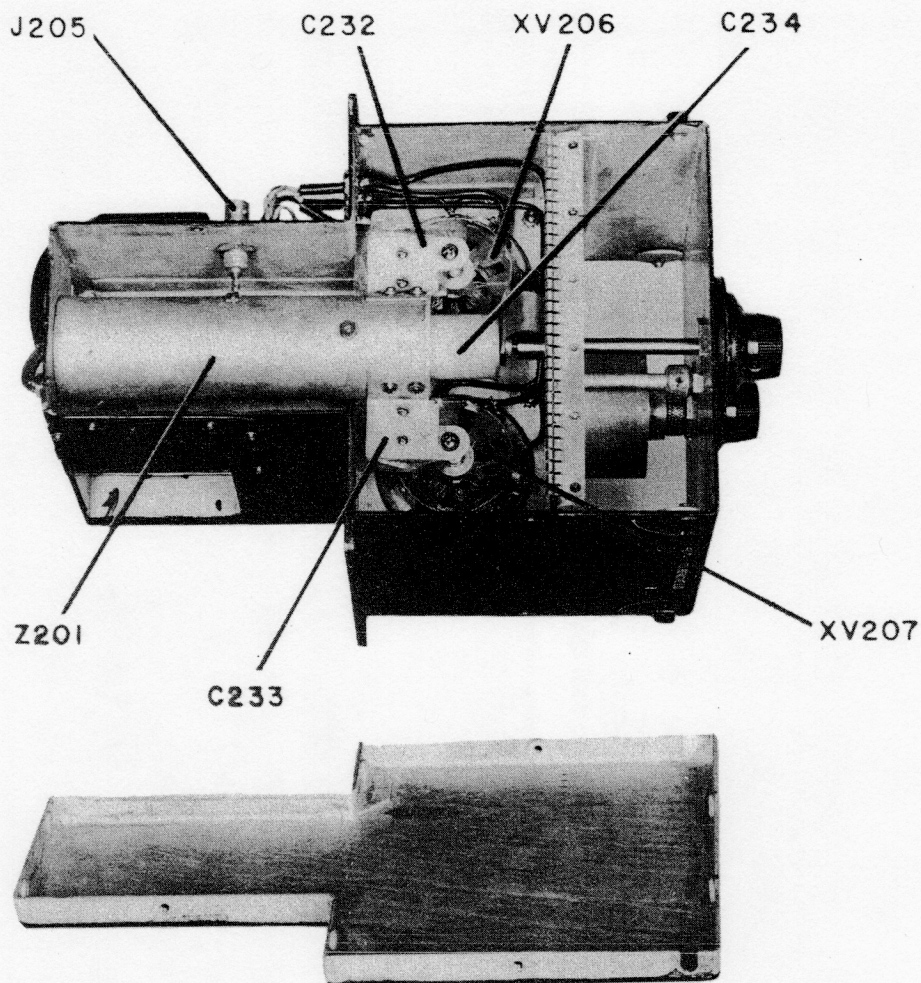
A. Power Amplifier Assembly, Grid Cover Removed
